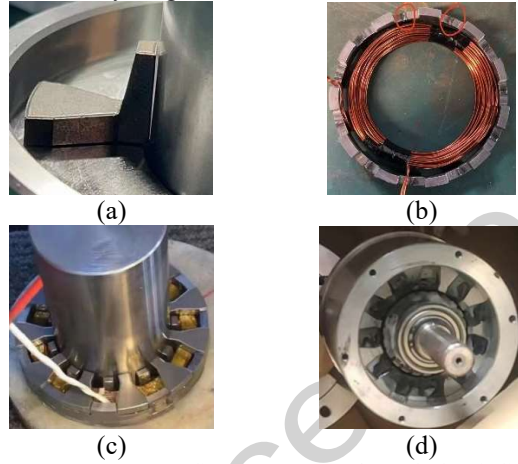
Prototype structure diagram. (a) stator claw pole (b) windings and stator yoke silicon steel laminations (c) the single-phase stator assembly diagram (d) complete motor assembly diagram
